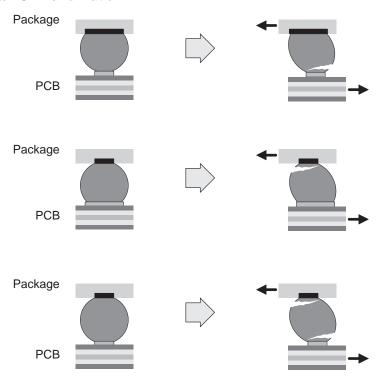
illustrates why the layout and dimensions of the package pads and the board lands are critical. Matching the diameters of the PCB pad to the package side BGA pad helps form a symmetrical interconnect, and prevents one end of the interconnect from exhibiting a higher stress condition than the other.
